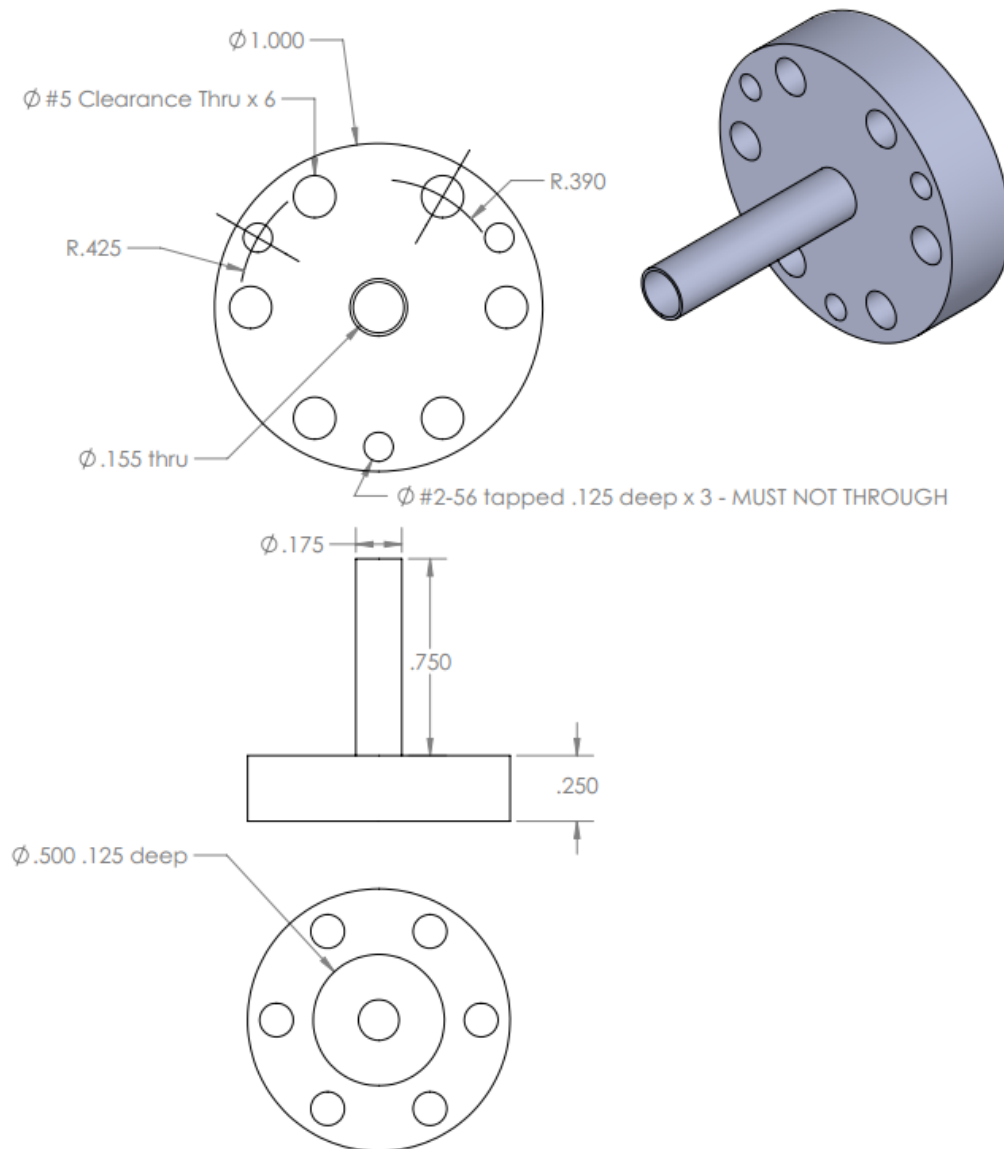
Drawing of the vertical macor stands for our cryogenic feedthrough. Three of these pieces are needed for a complete assembly.
